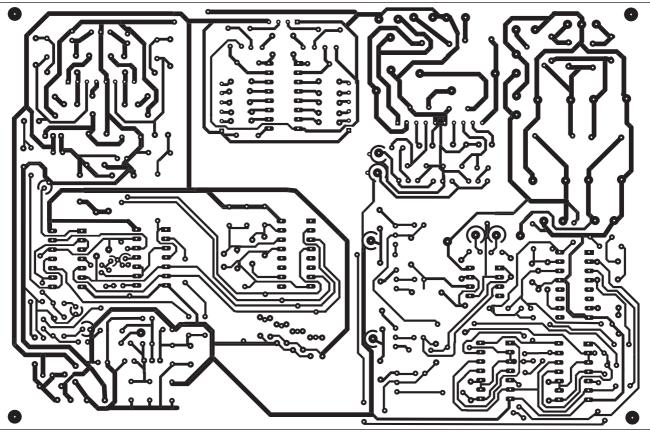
Actual-size, single-sided PCB for stereo cassette player
